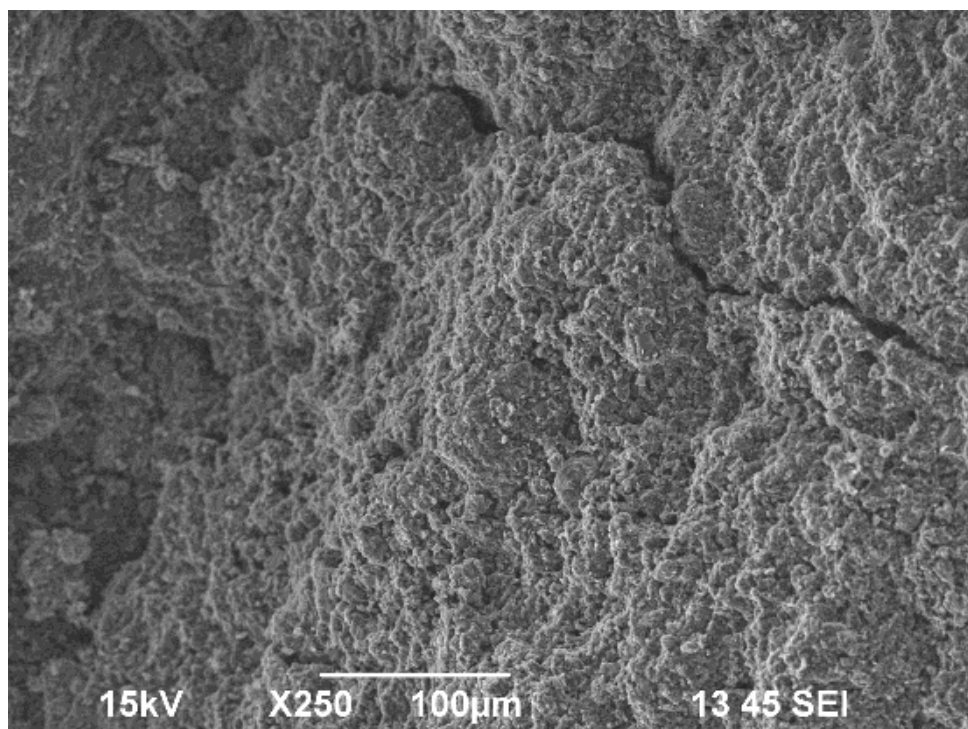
Detail SEM image under 30° angle of PCIB sample U114 at detail location 2, on the axial fracture surface.
